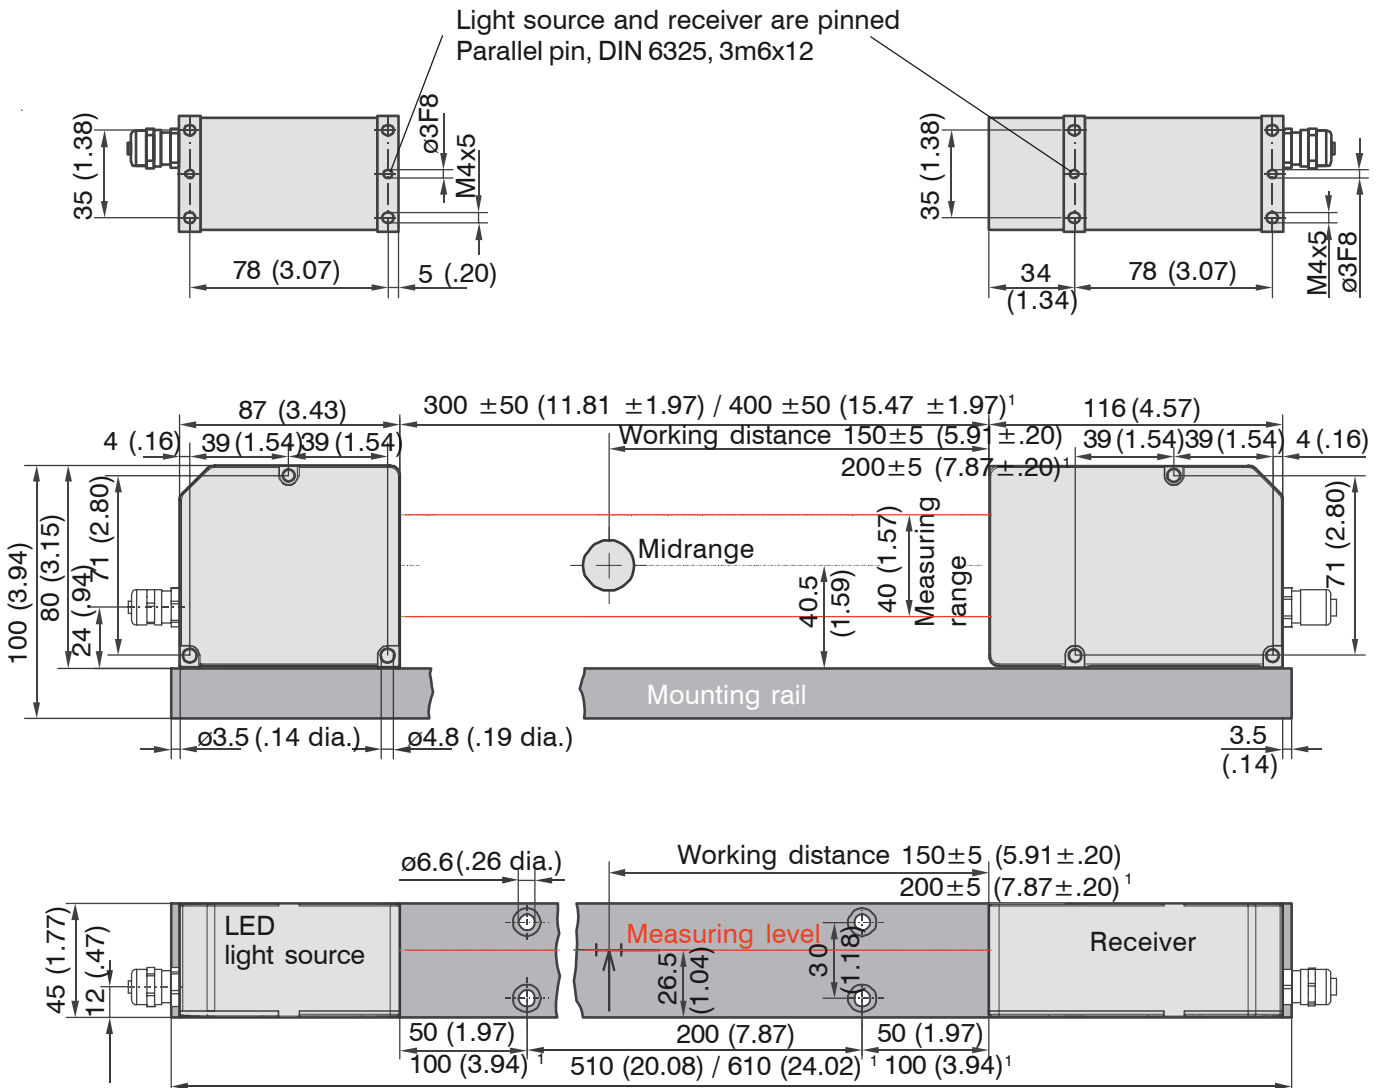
Dimensional drawing of the sensor unit with mounting rail, dimensions in mm (inches), not to scale
